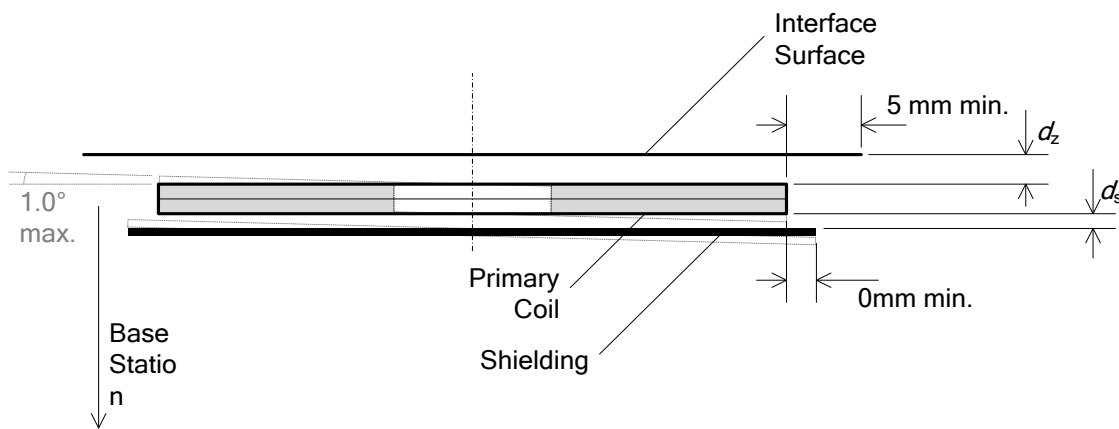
Primary Coil assembly of Power Transmitter design A7
